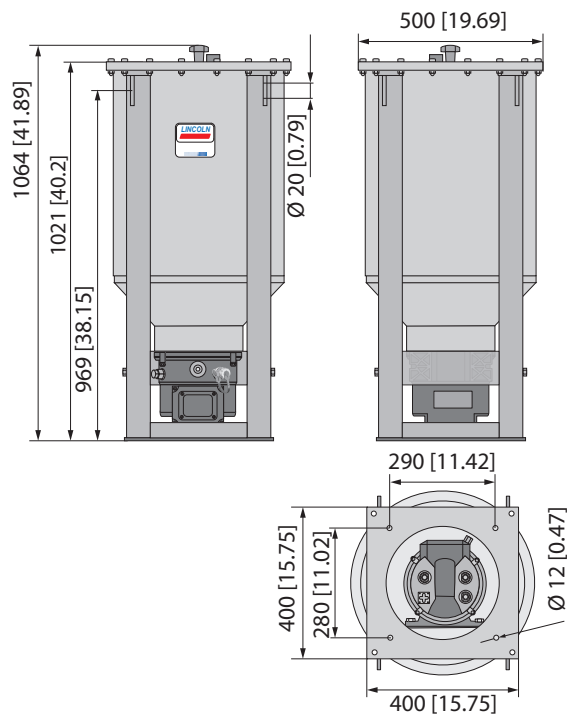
Minimum installation dimensions 100 Litres sheet steel reservoir
